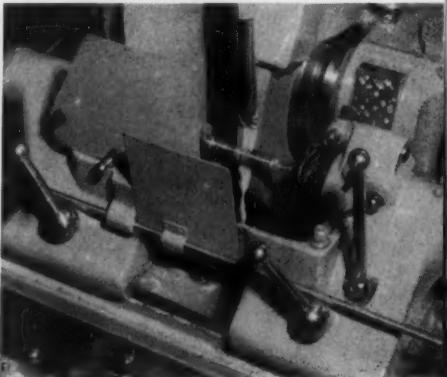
A cylindrical grinder is shown performing the finish O.D. grind on the slider "O" rings to within 0.0001 inch.
